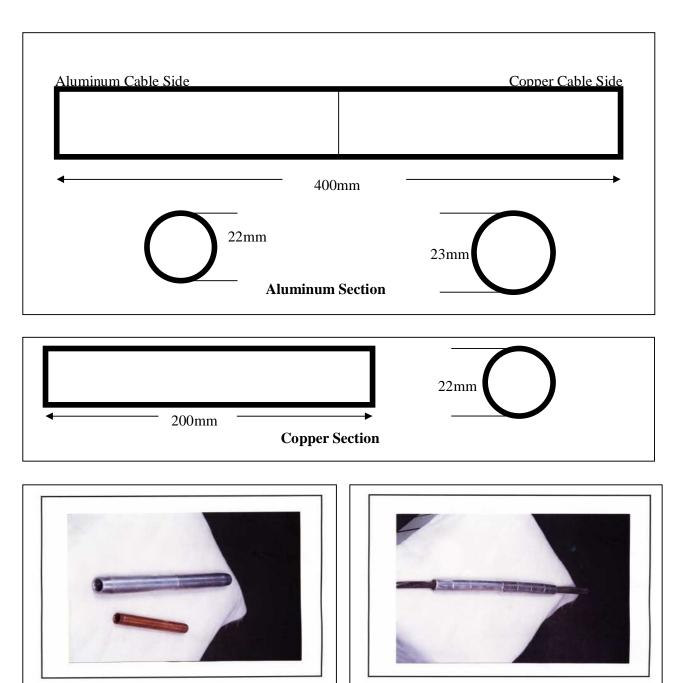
(Upper) Sectioning of Al and Cu straight connectors, (Lower) The manufacture connectors before and after compression.
